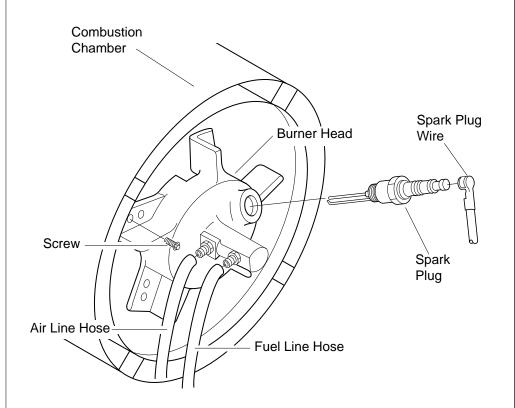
Removing Burner Head, 20,5/26,4 kW (70/90,000 BTU/Hr) Models
